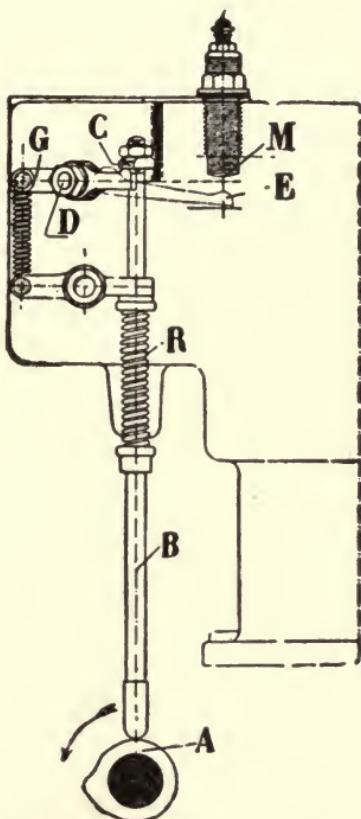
THE PEUGEOT CONTACT-BREAKING MECHANISM.
